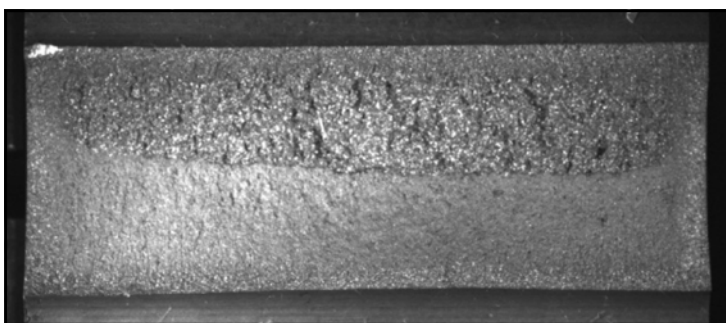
Typical tooth root fracture surface, crack initiation on the surface (Ref. 20).
